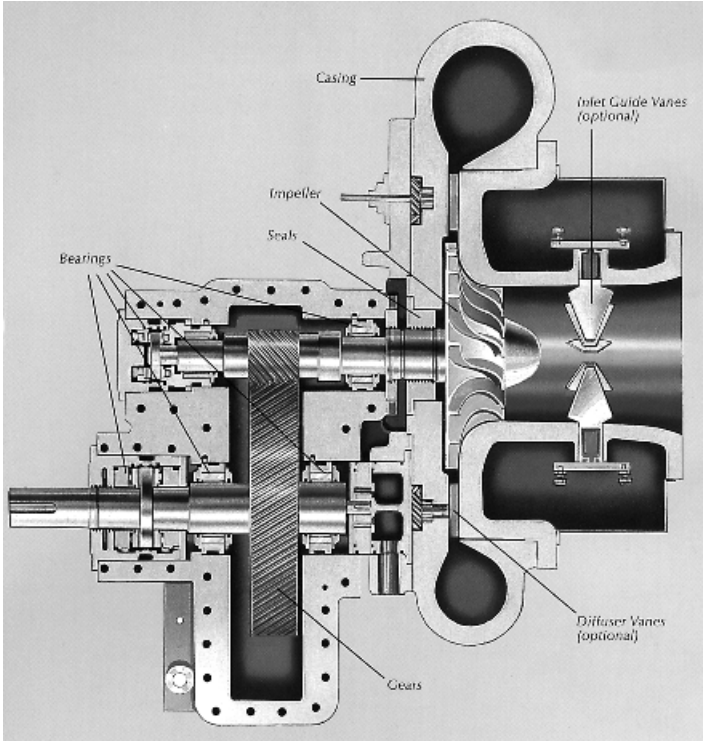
Single-stage centrifugal compressor with integral step-up gearing. (*Dresser-Rand Company, Olean, N.Y.*)
